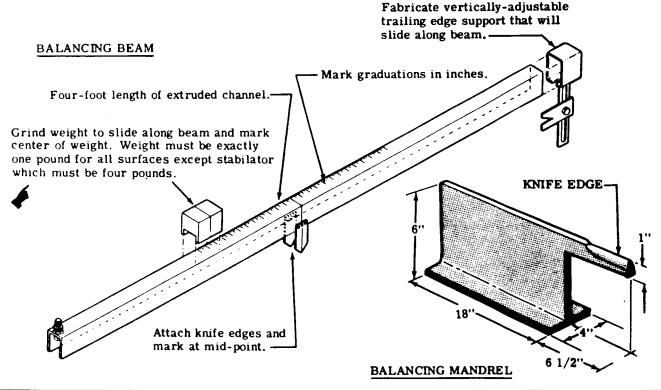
Control Surface Balancing (Sheet 1 of 4)
